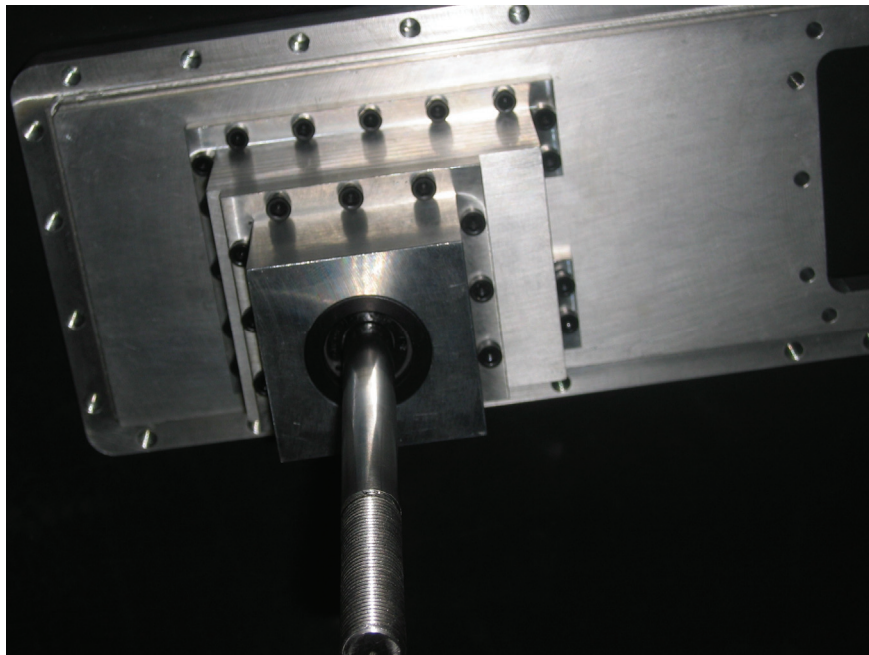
Similar view of shaft mounted inside linear motion ball bearing.
